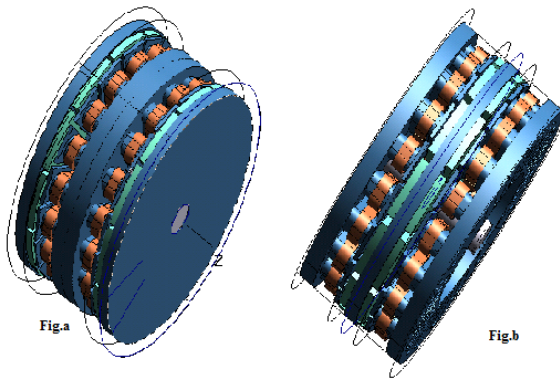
Double sided model a) Internal Stator, Internal Rotor Machine
